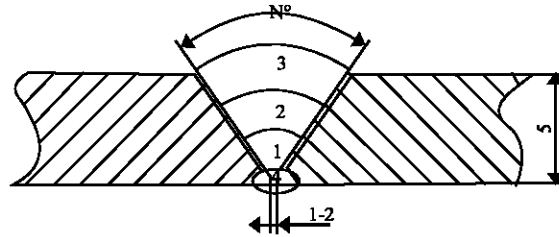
Groove shape and welding bead layout of the 5 mm plate
